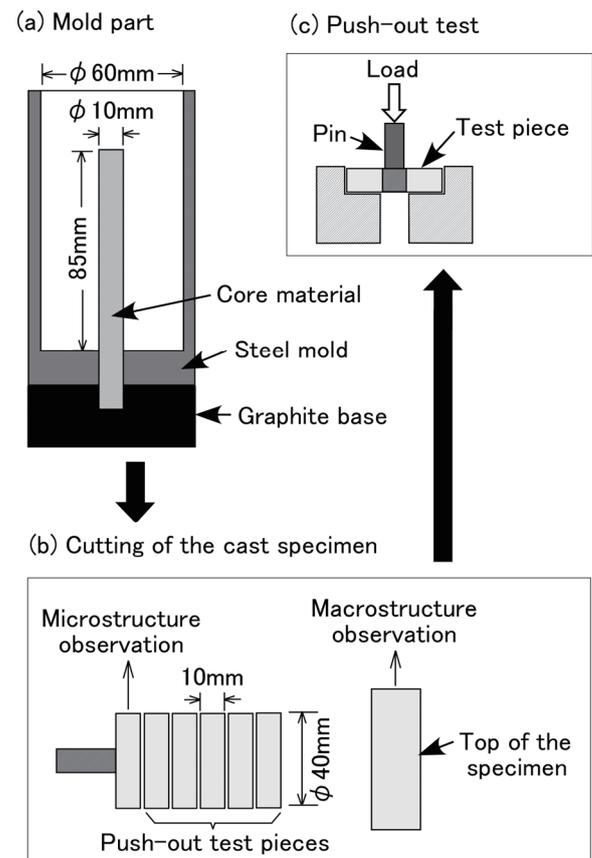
Experimental procedures. (a) Mold part of the apparatus. (b) Preparation of push-out test pieces and specimens for macro- and microstructure observation. (c) Set up of the jig for the push-out test
